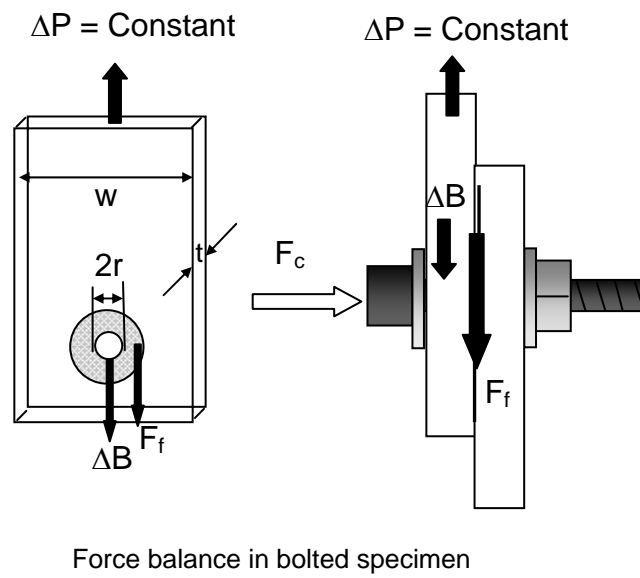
Analytic model for mechanical fatigue failure at lower tightening torques.
